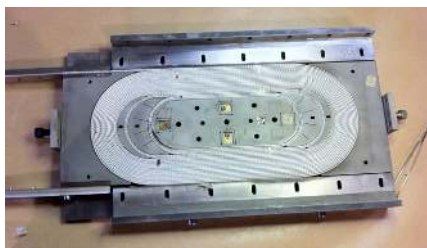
Short Model coil, second coil set: a reacted double pancake coil inside the reaction mould.
